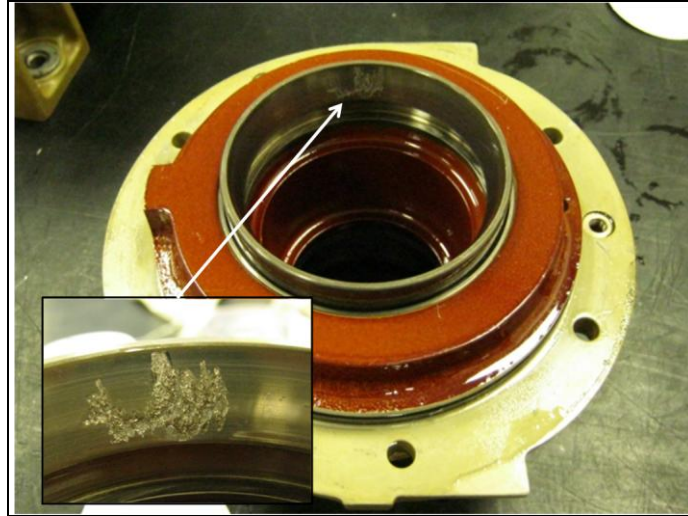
Spalled inboard-input IGB tapered roller bearing outer race.
